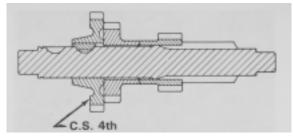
Install 4th speed gear key in countershaft key slot. With hub of gear as shown, align 4th gear keyway with key in countershaft. Press gear on shaft.
